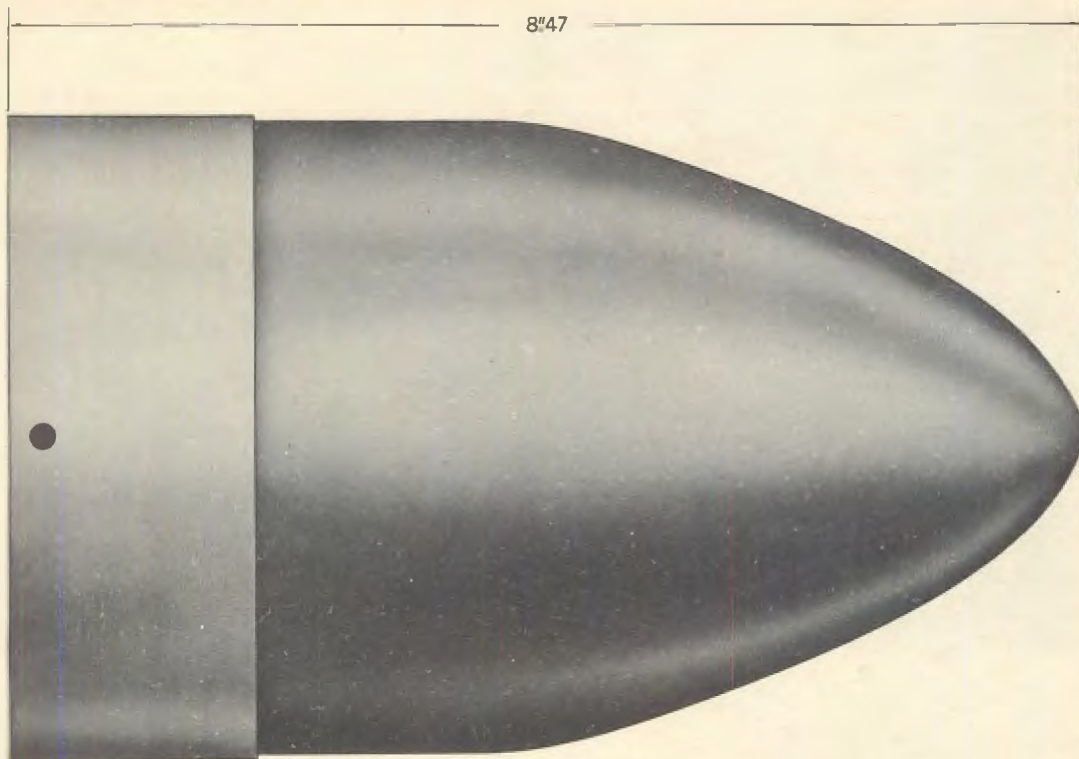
5.0-Inch Rocket Head Mk 8 Mod 2 (AP), External View.
